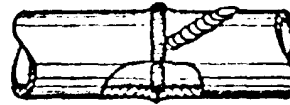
Technique for welding pipe joint in the horizontal hand position
